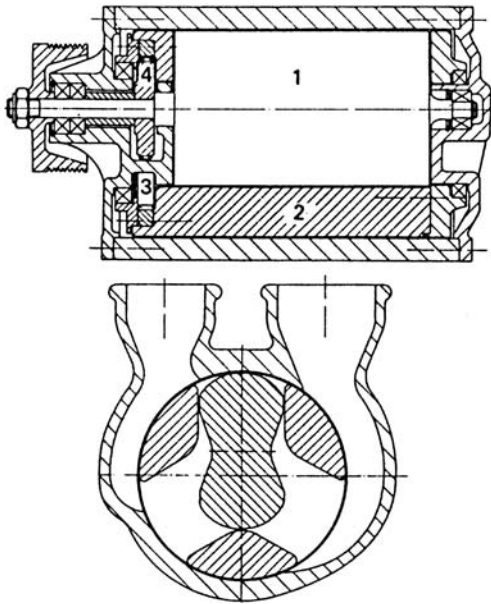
Layout of the Ro-charger rotary piston supercharger: 1, twin-lobe rotating position; 2, triple-chamber rotating cylinder; 3, ring gear that drives cylinder; 4, sprocket gear, which meshes with ring gear to drive piston drive shaft. (Courtesy Kuhnle, Kopp & Kausch AG.)
